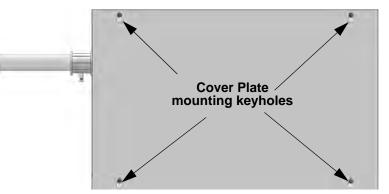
Cover Plate Mounting Keyholes and Cover Mounting Screws Alignment
